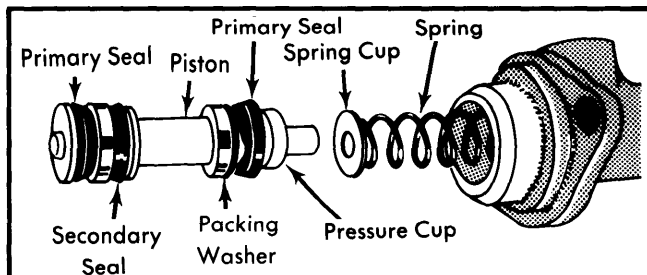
Master Cylinder Secondary (Front) Piston Assy.
